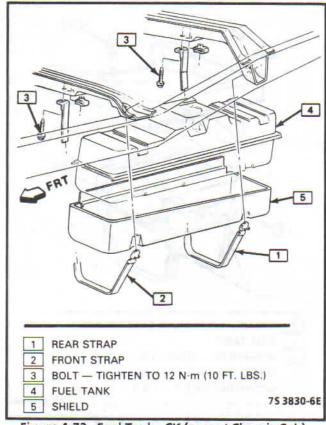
Fuel Tank - CK (except Chassis Cab)
